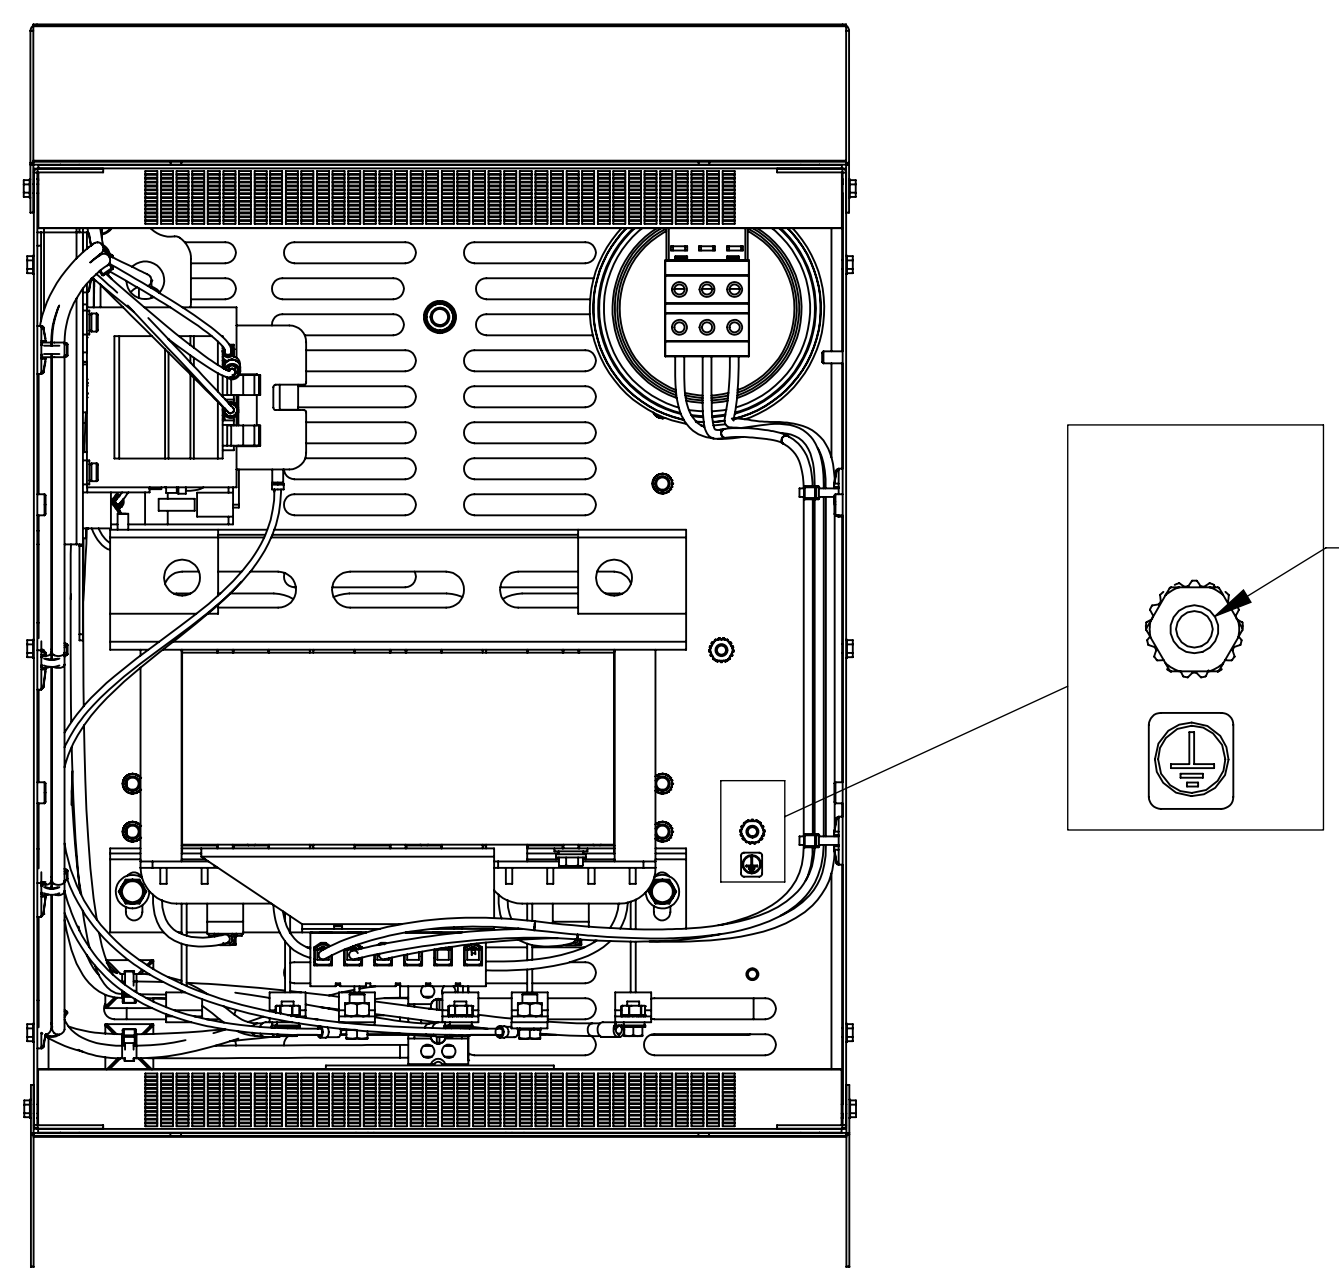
DETAIL A CUSTOMER CONNECTION DETAIL VIEW (THERMAL)
